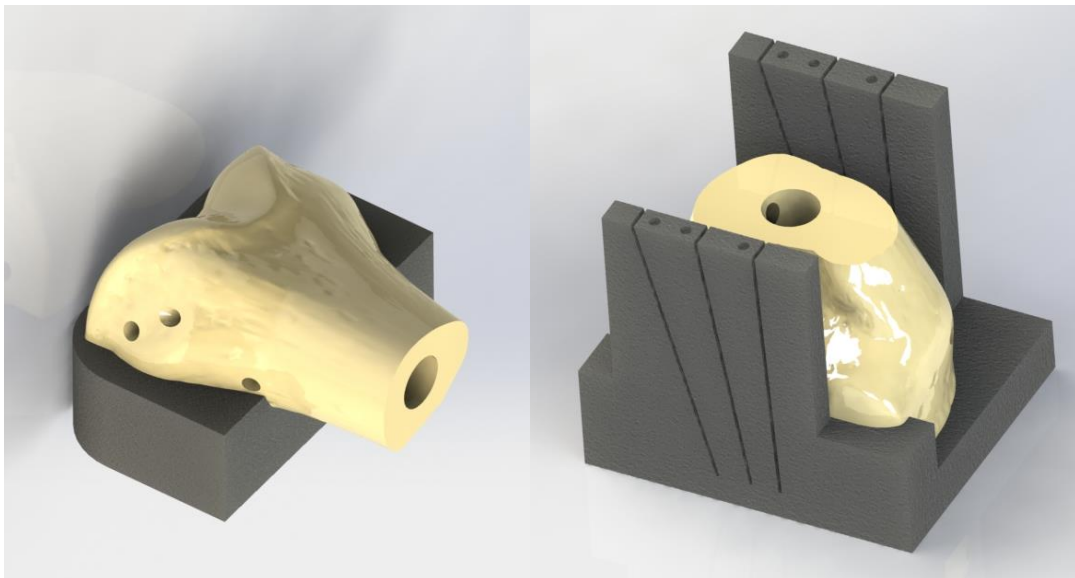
Rendering of SolidWorks model of 3D-printed cutting fixtures and distal femur sample. Using the guide-slots in the fixture, a scroll saw is used to osteotomize the fixture according to the prescribed fracture type (AO/OTA 33-C2 or AO/OTA 33-C3).
